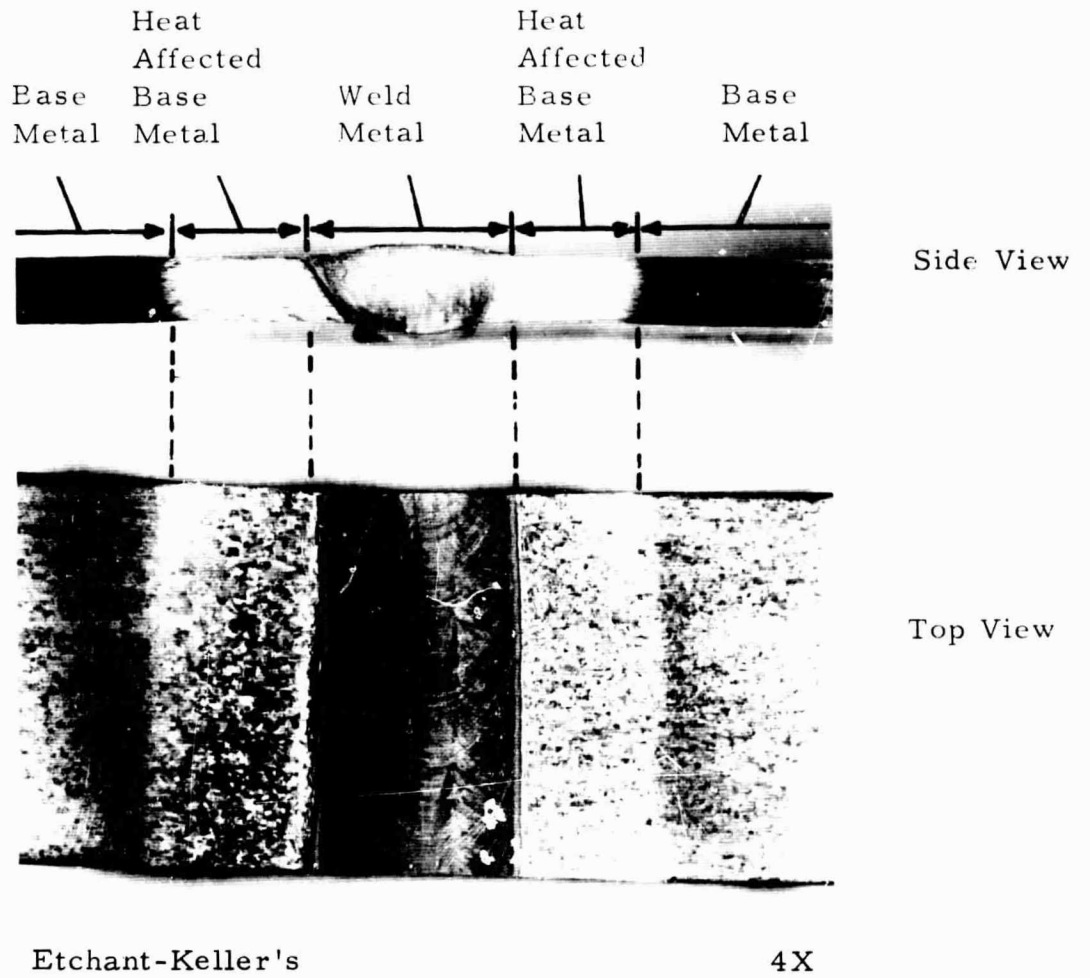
MIG X7106 TENSILE SPECIMEN. FAILURE LOCATED AT FUSION LINE.
